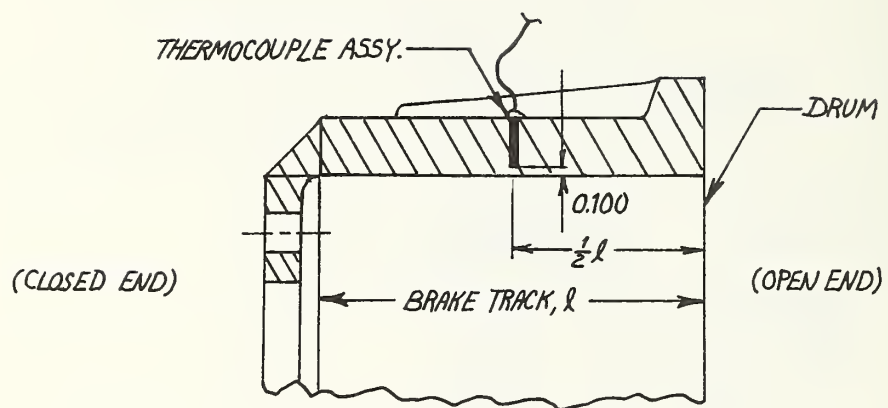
BRAKE DRUM THERMOCOUPLE LOCATION
